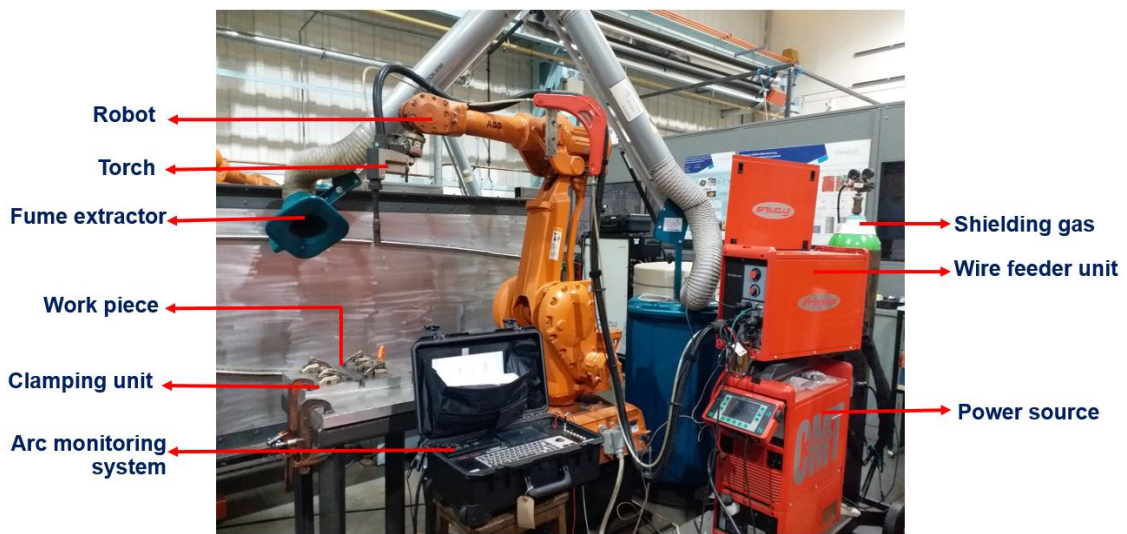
Experimental set-up – Gas metal arc welding system
